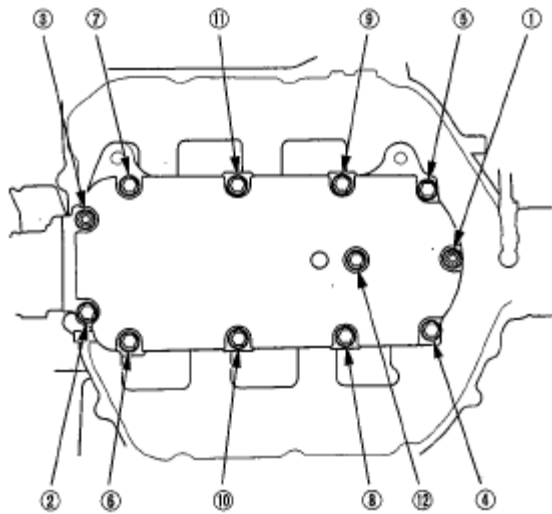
Identifying Upper Cover Mounting Bolts And Nuts
